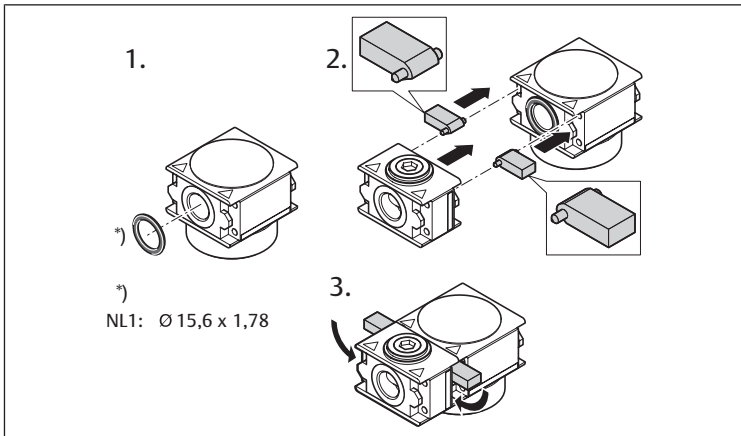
Block assembly with block assembly kit W04 | Series NL1
